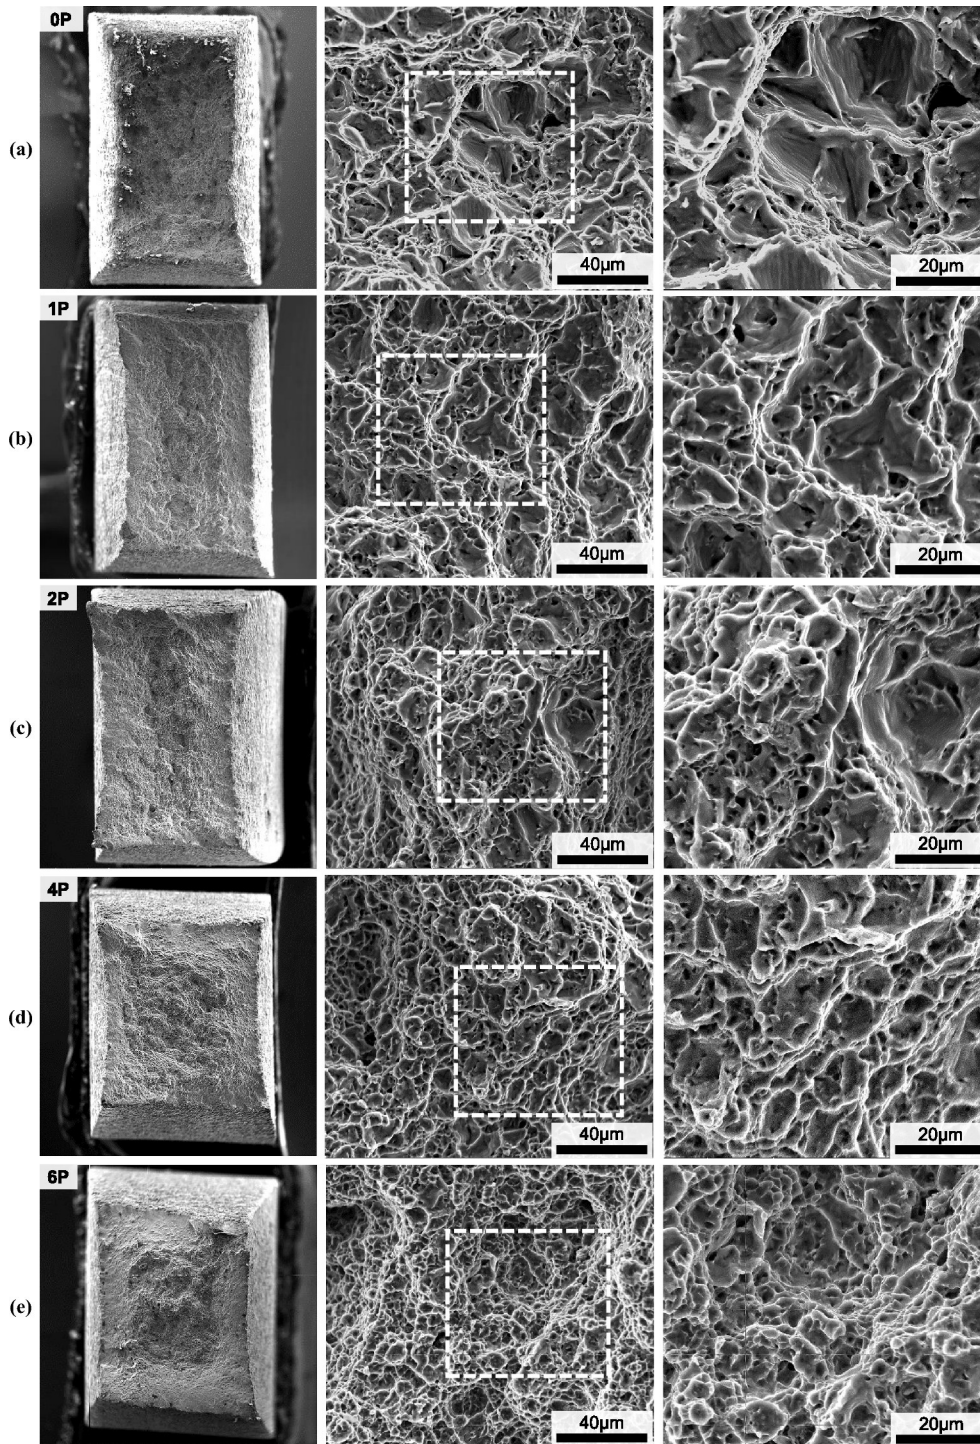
Scanning electron microscope (SEM) images of the fractured tensile samples showing the fracture morphology for unprocessed and I-ECAP processed samples.
